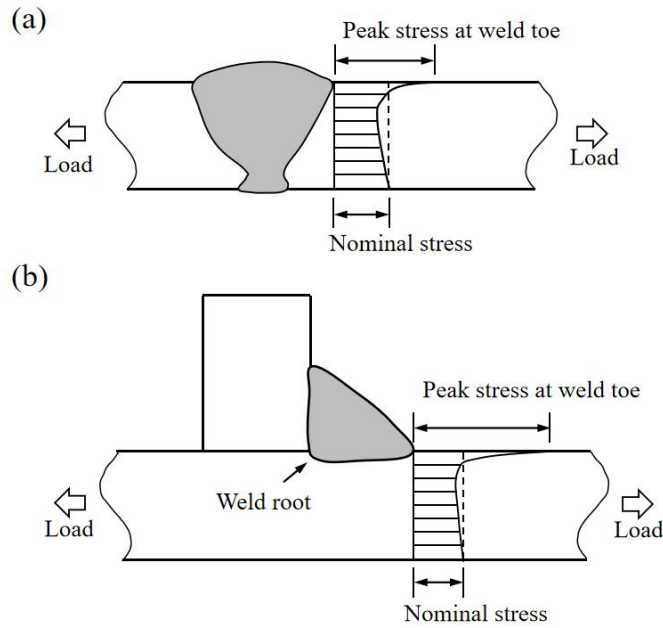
Stress concentration at weld toe for (a) the butt joint and (b) T-joint
